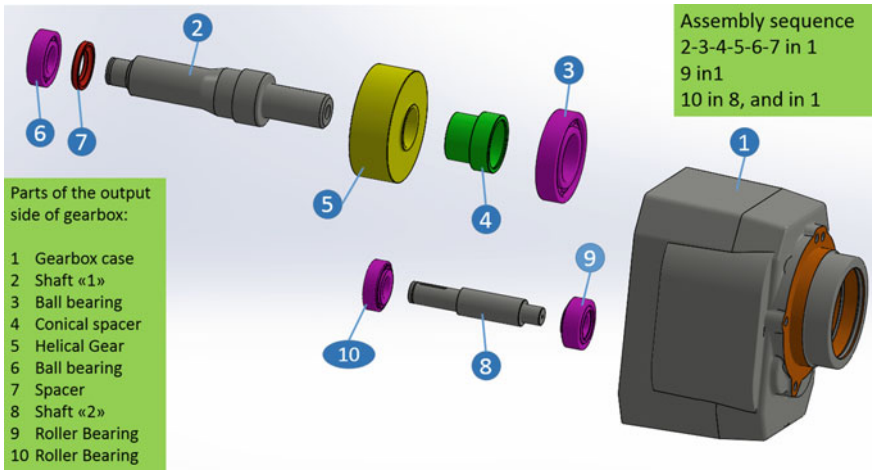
Parts of the output side of the gearbox and their assembly sequence
